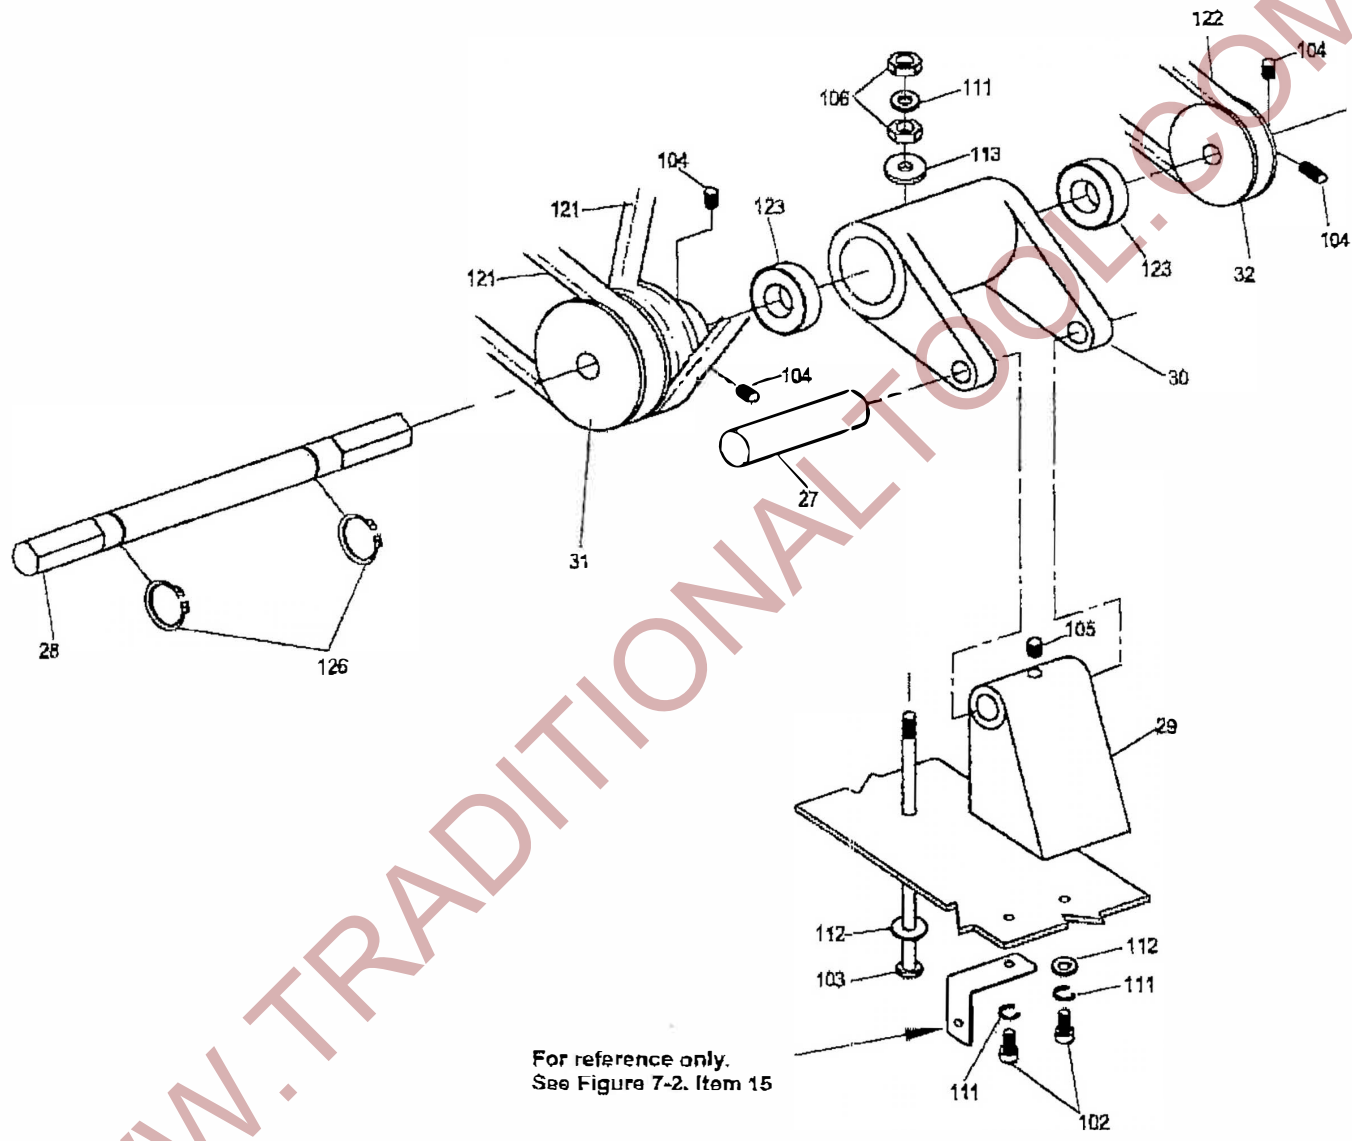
TRANSMISSION BRACKET ASSEMBLY
